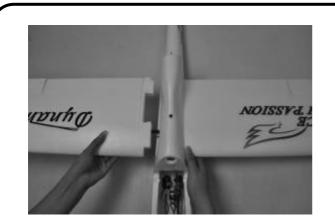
Pictures show the wing plug up to the side of each main wing panel.
